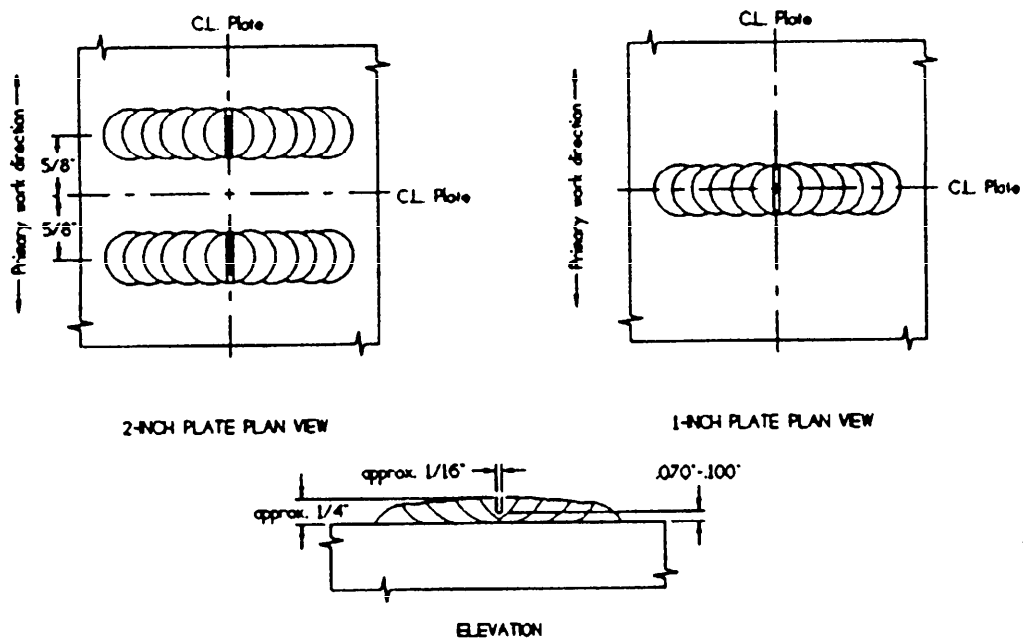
BASE METAL EVALUATION WITHOUT A WELD JOINT
